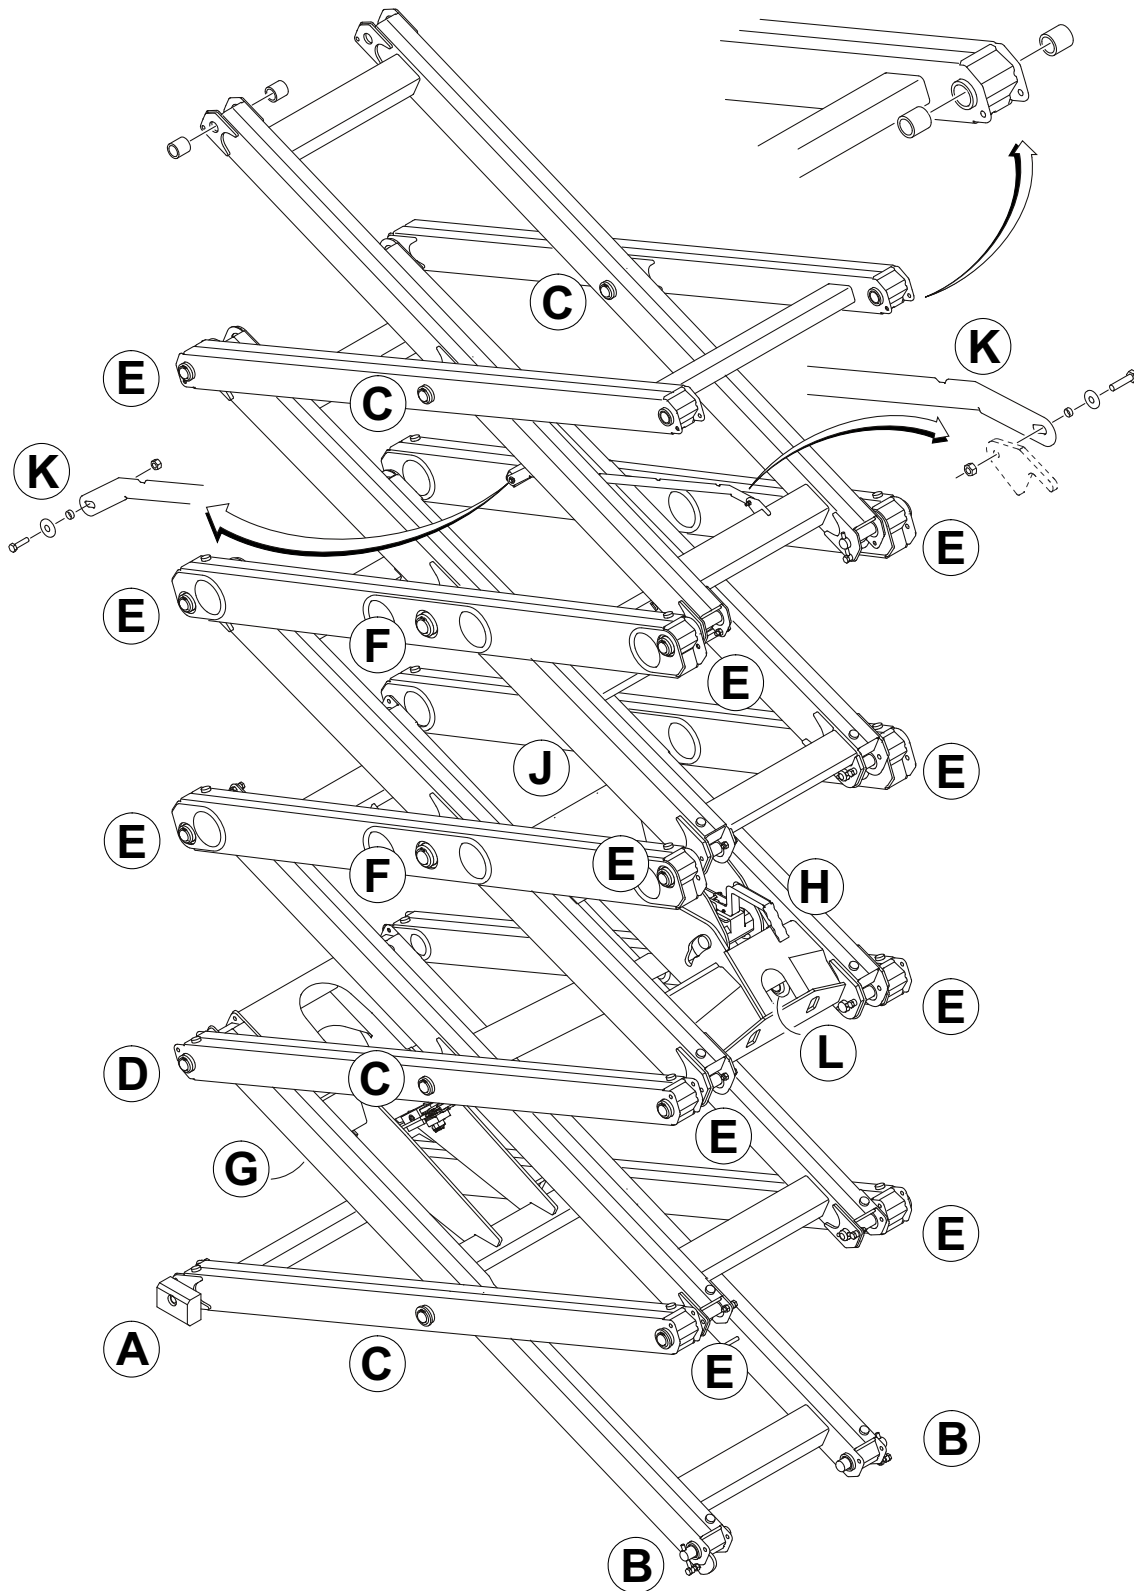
3248RS/10RS - Scissor Arm Assembly - Ref. Figure 3-45.
